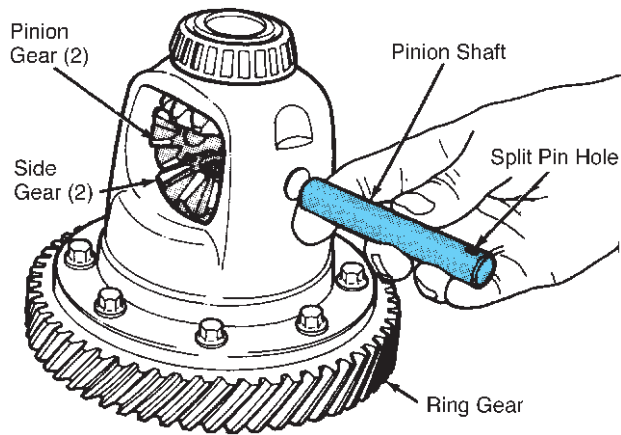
With the lock pin removed, the pinion shaft can be slid out of the differential case. (Courtesy of DaimlerChrysler Corporation)
